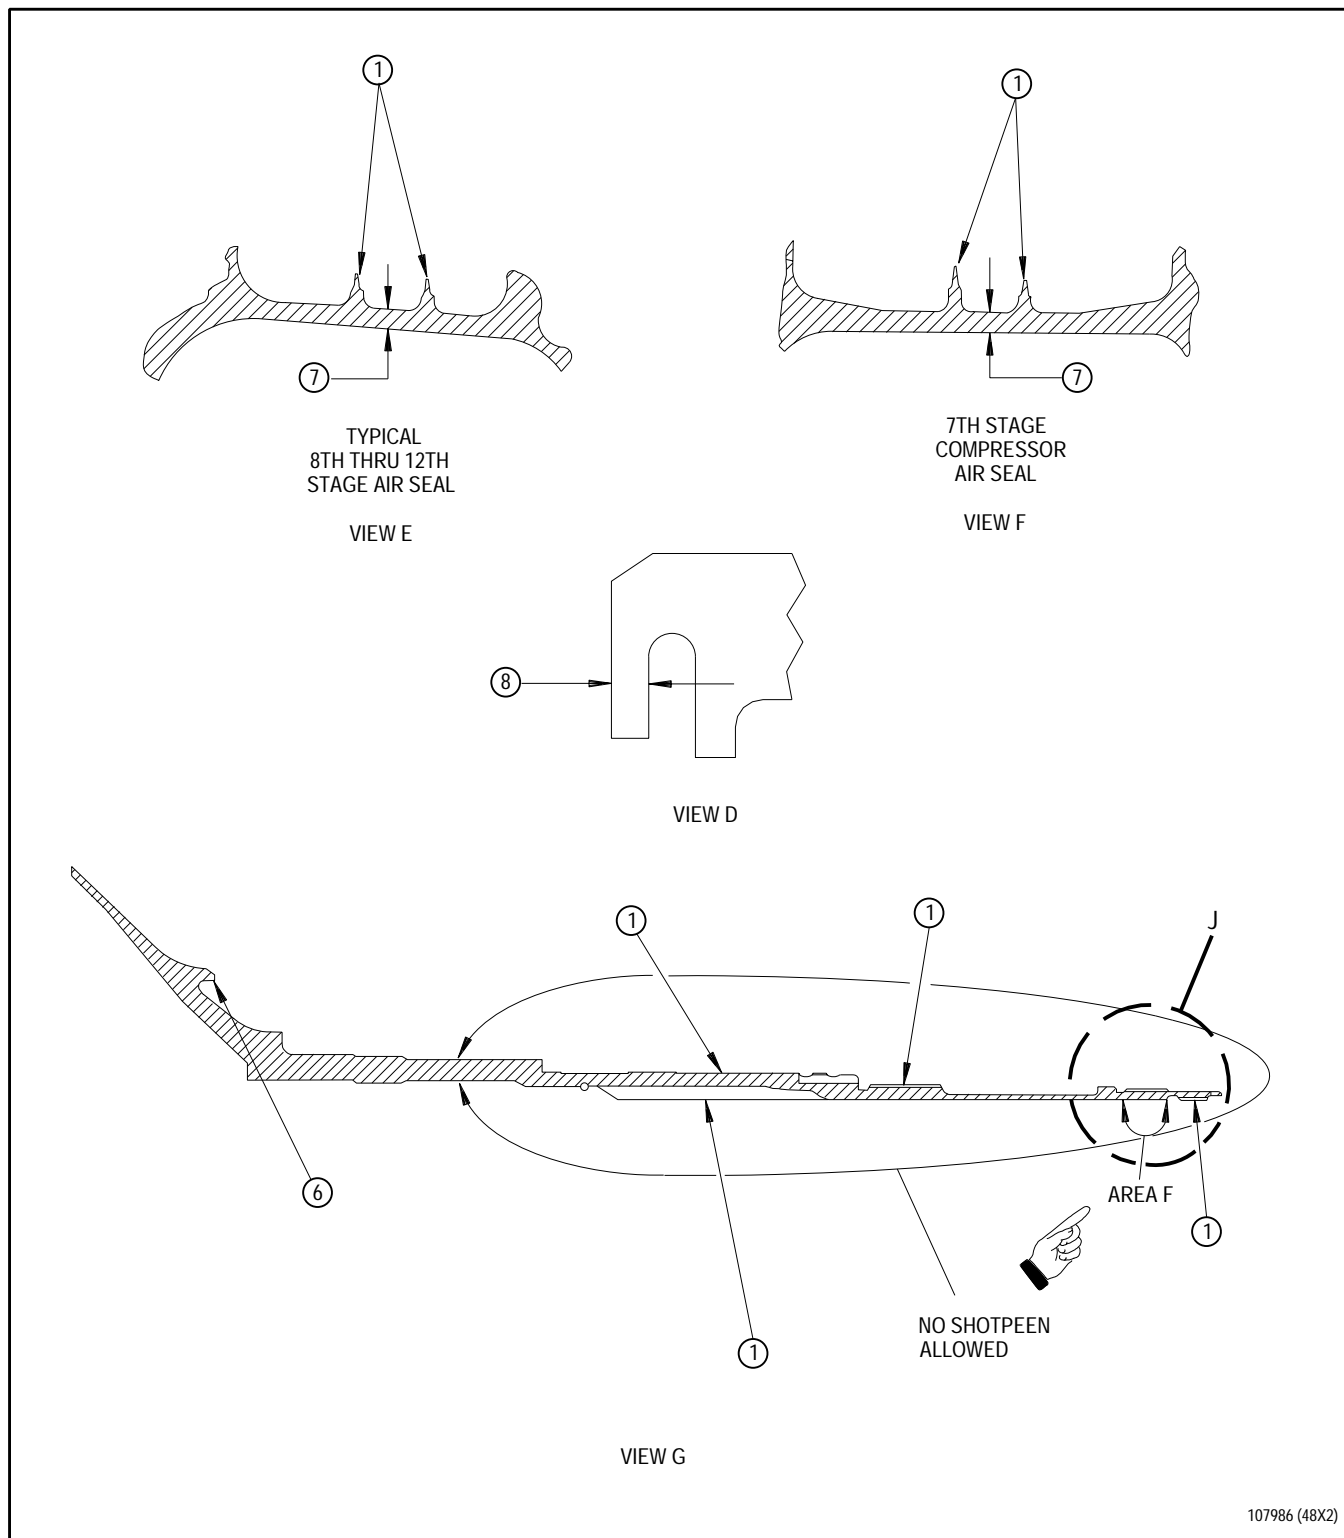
Disk-Drum Rotor, Rear Compressor, Rear, Assembly - Blend Repair (Sheet 2 of 6)
